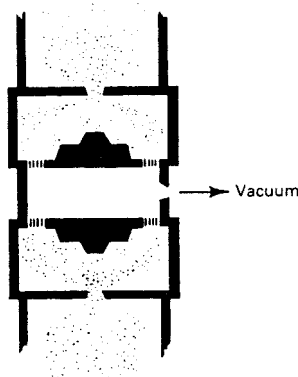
High-pressure vacuum-fill squeeze machine. (From *ASM Handbook, Machining*, Vol. 15, 9th ed., ASM International, Metals Park, OH, 1989, 343. With permission.)
